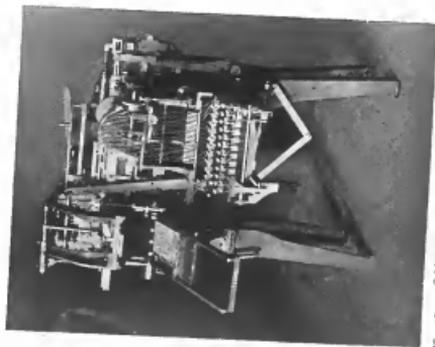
Older type-bar machine; first model, using a metric-slash and casting a grooveed base upon a line of short type.
